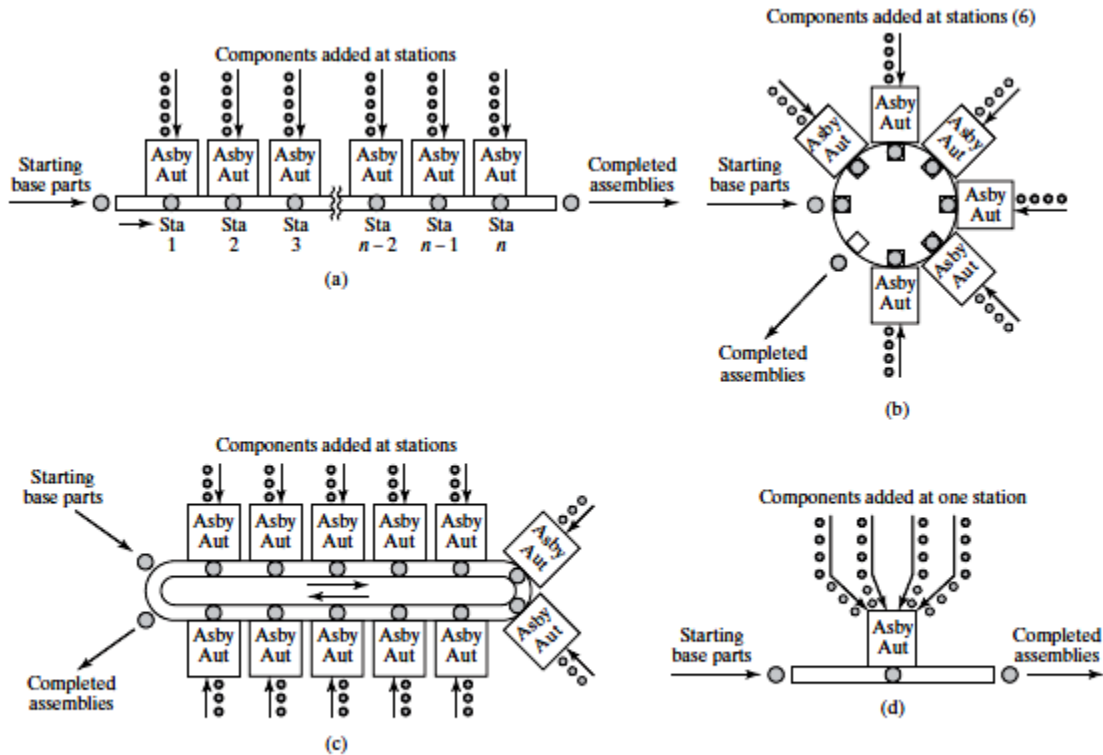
Types of automated assembly systems: (a) in-line, (b) dial-type, (c) carousel, and (d) single station.
